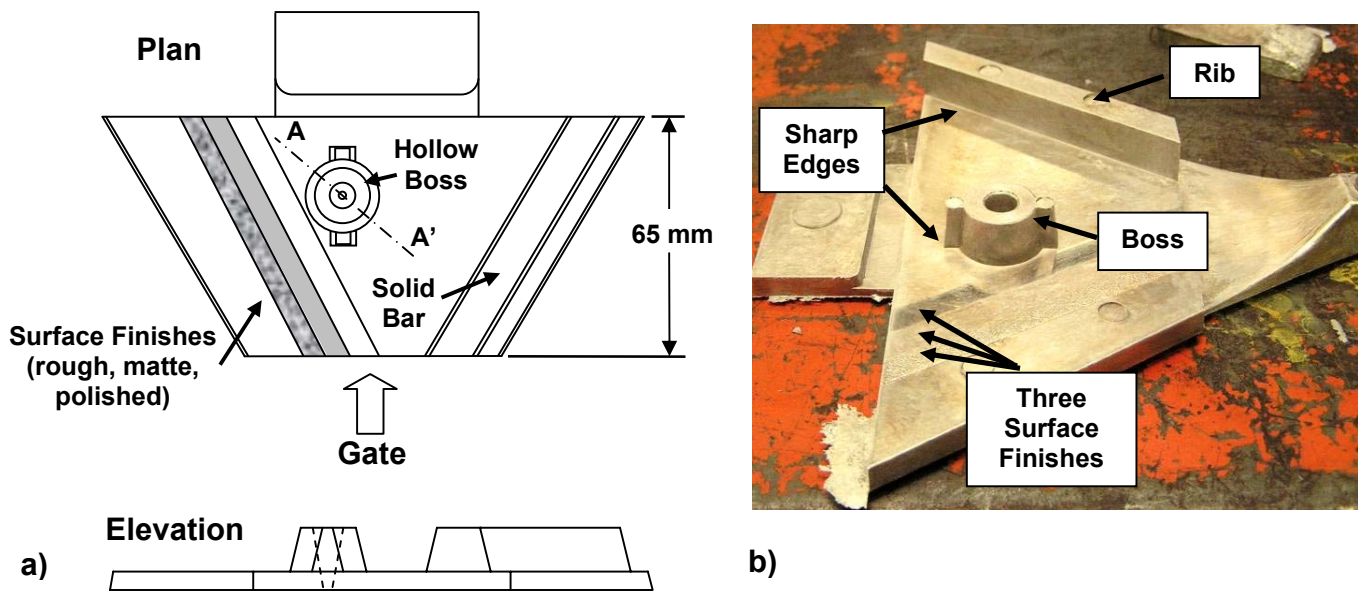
(a) Schematic diagram of the part that is produced with the diecastability test die (b) Photograph of casting showing large rib and boss.
